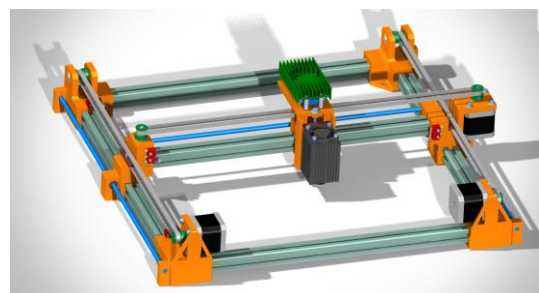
A constructive solution with a guiding profile of extruded aluminium and 3d print supports
